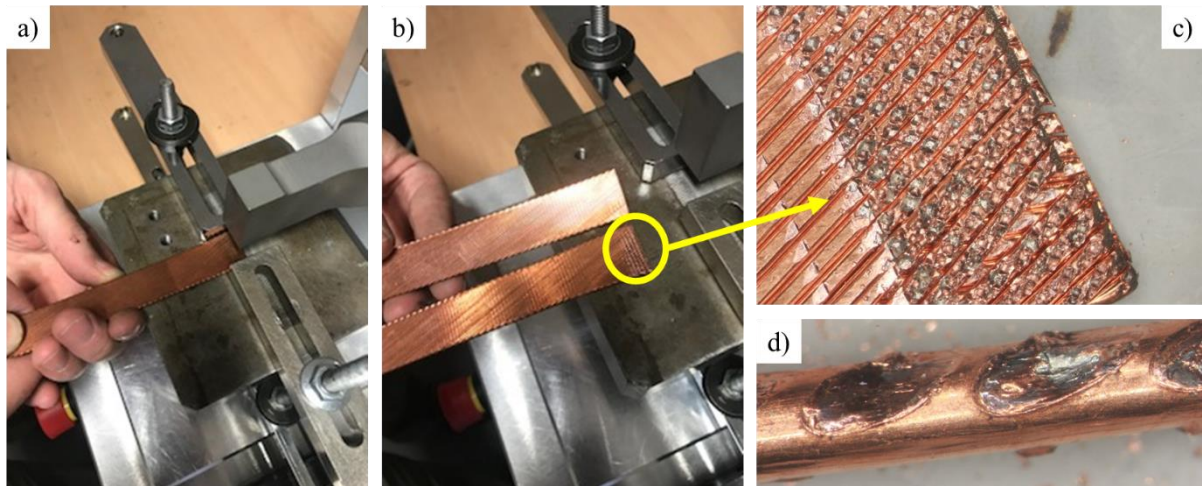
Unreacted Nb_3Sn cables before (a) and after (b) an ultrasonic welding trial. Zoom of the cable (c) and strand (d) after a trial of cable-cable and strand-strand welding.
